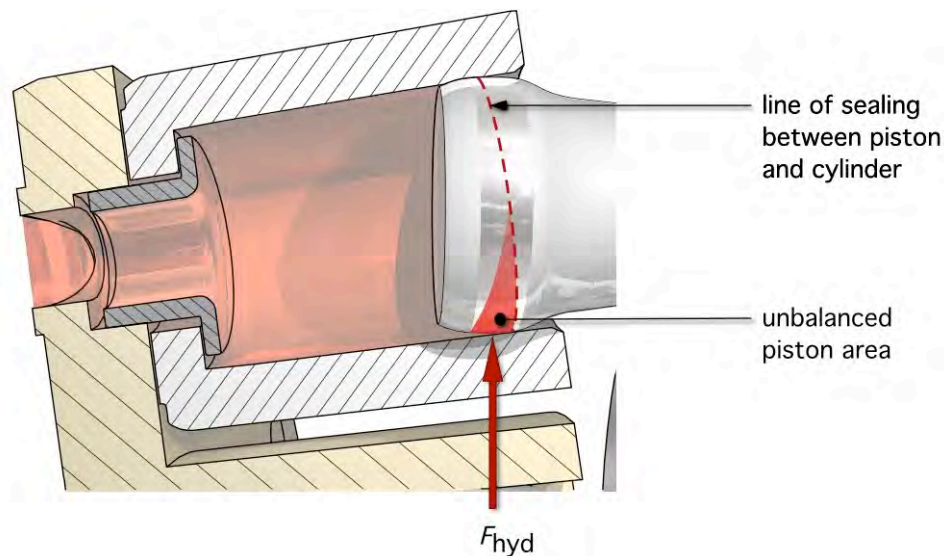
Sealing concept without a piston ring in which the hydraulic pressure is the direct driving force on the piston i.e the rotor of the pump.
